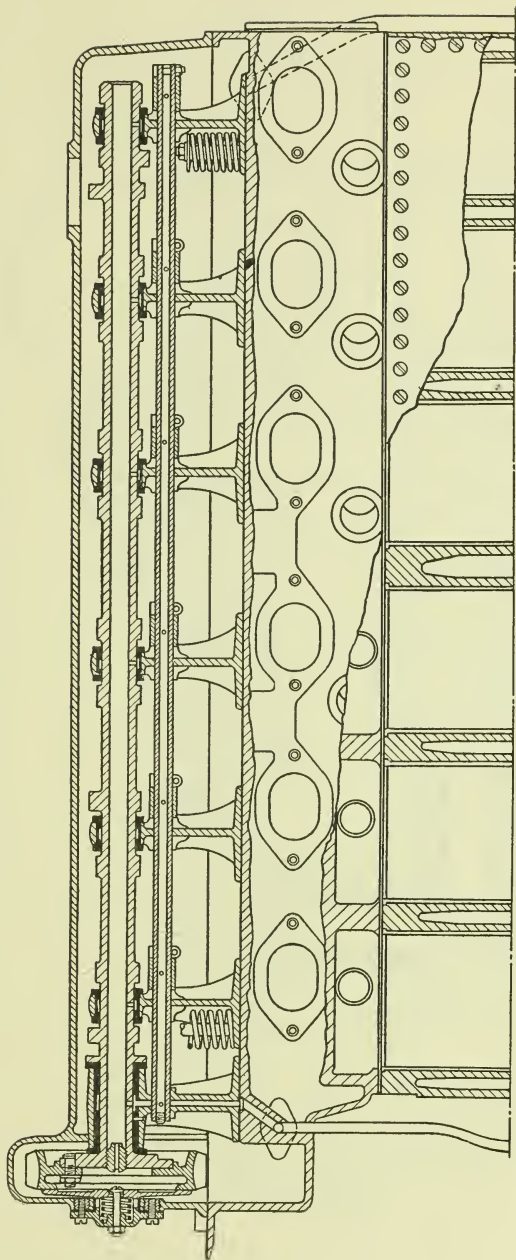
THE UPPER PORTION OF THE NAPIER OVERHEAD CAMSHAFT ENGINE
